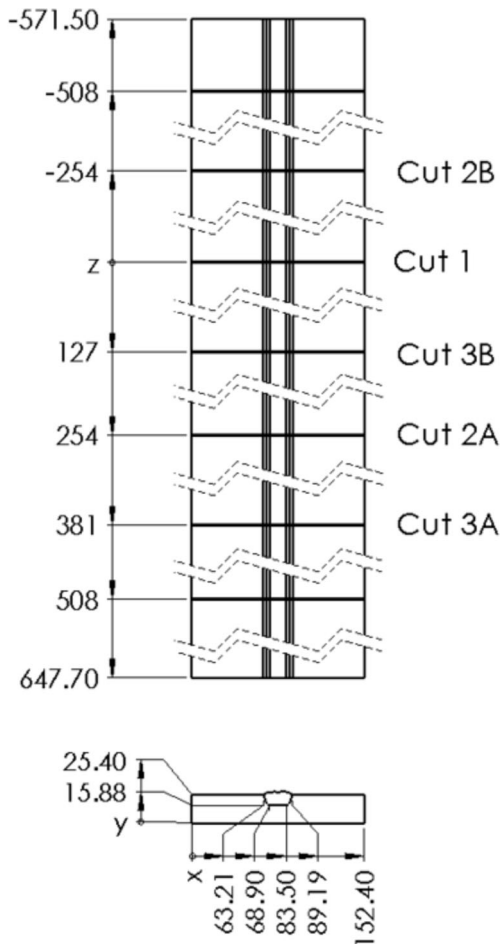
Stainless steel dissimilar metal dimensions and measurement locations (dimensions in mm)
